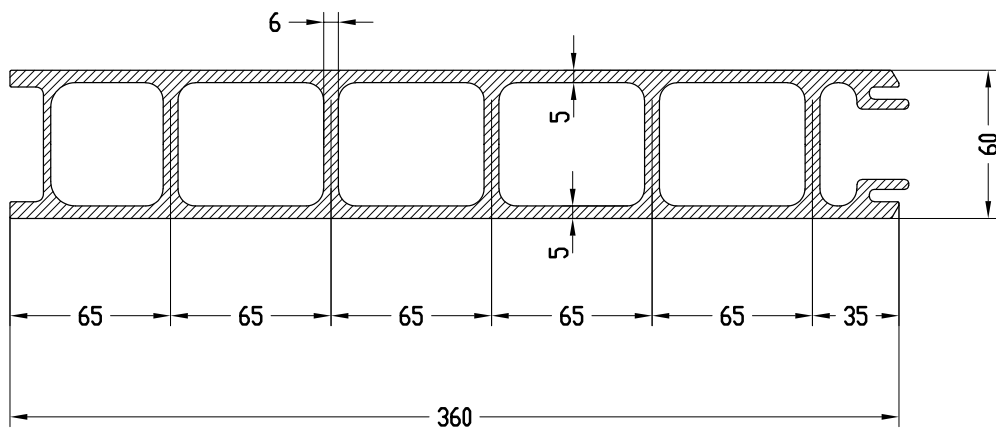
Profile type 2: Female connection preparation for MIG-welding to the right.
